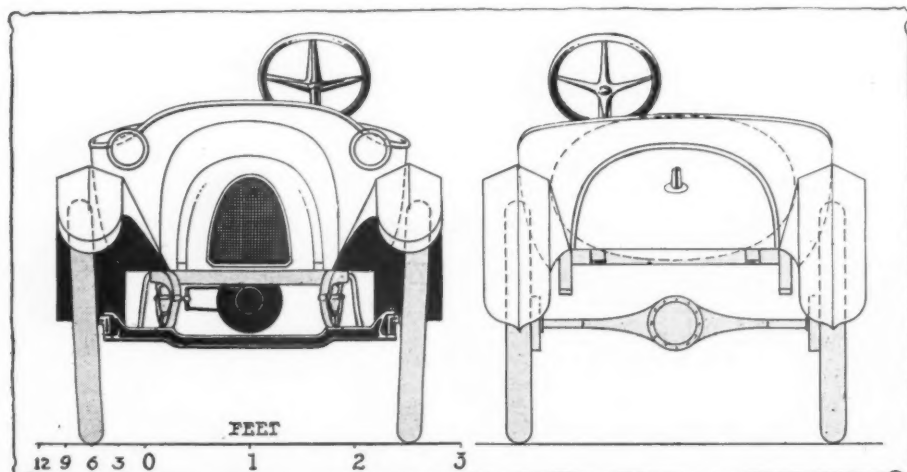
Front view, showing starter. Fig. 3—Rear view, showing spindle for extra wheel
